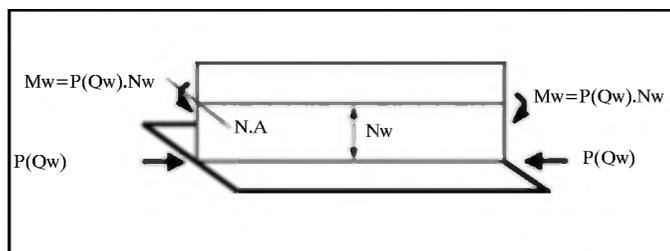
Welding moment for longitudinal bending distortion of the T-joint.
